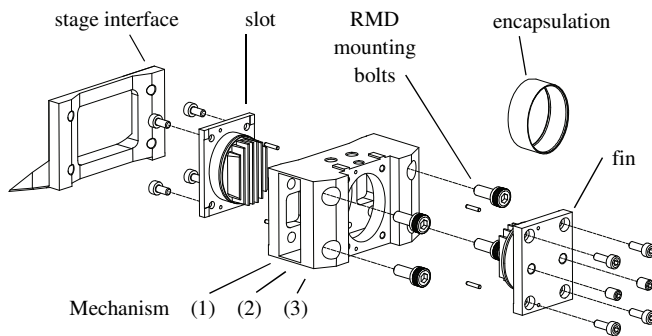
Exploded view of the RMD design with the different parts indicated.
